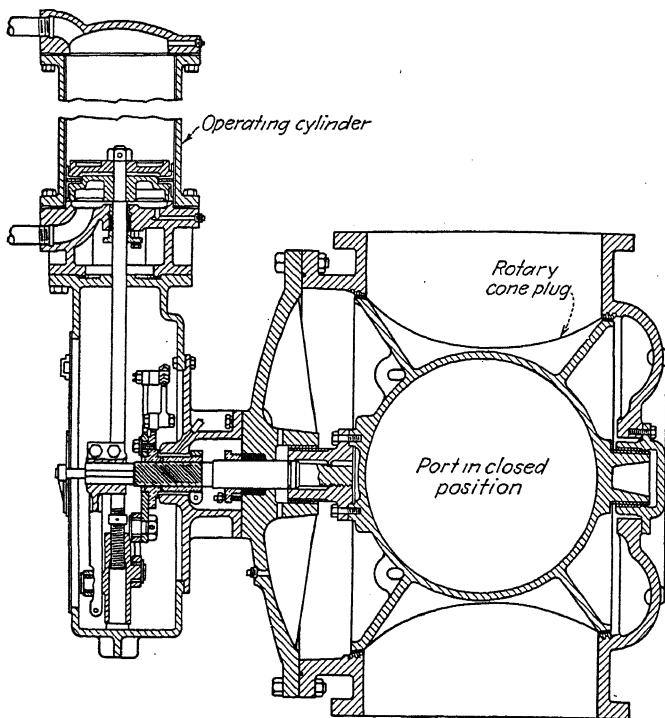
Hydraulically-operated pilot-controlled cone valve for use as a check valve or a relief valve for reducing shock pressure due to water hammer. (Courtesy of the Chapman Valve Manufacturing Company.)
